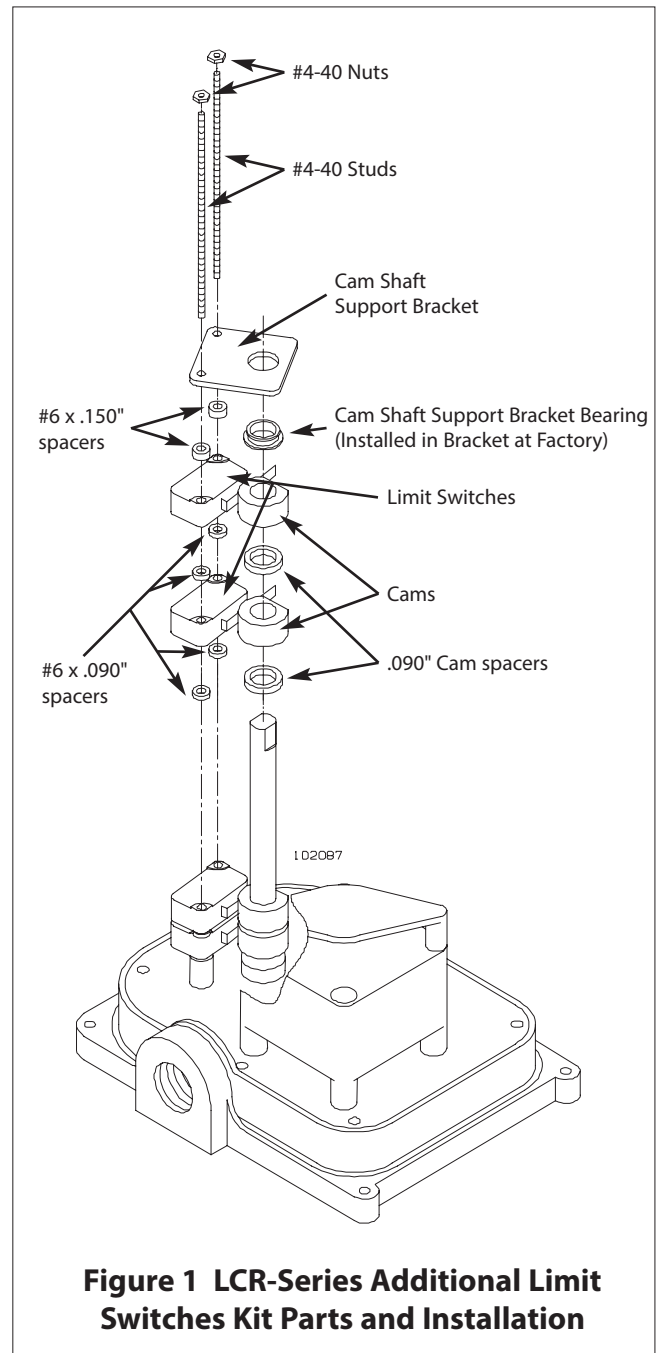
LCR-Series Additional Limit Switches Kit Parts and Installation
